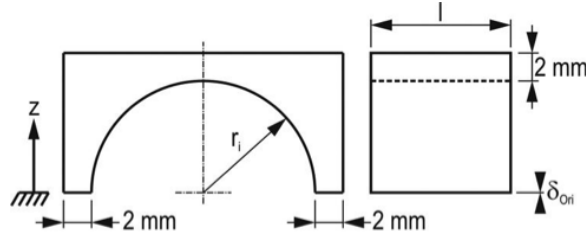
Test specimen for unsupported inner radii r_i [14].
